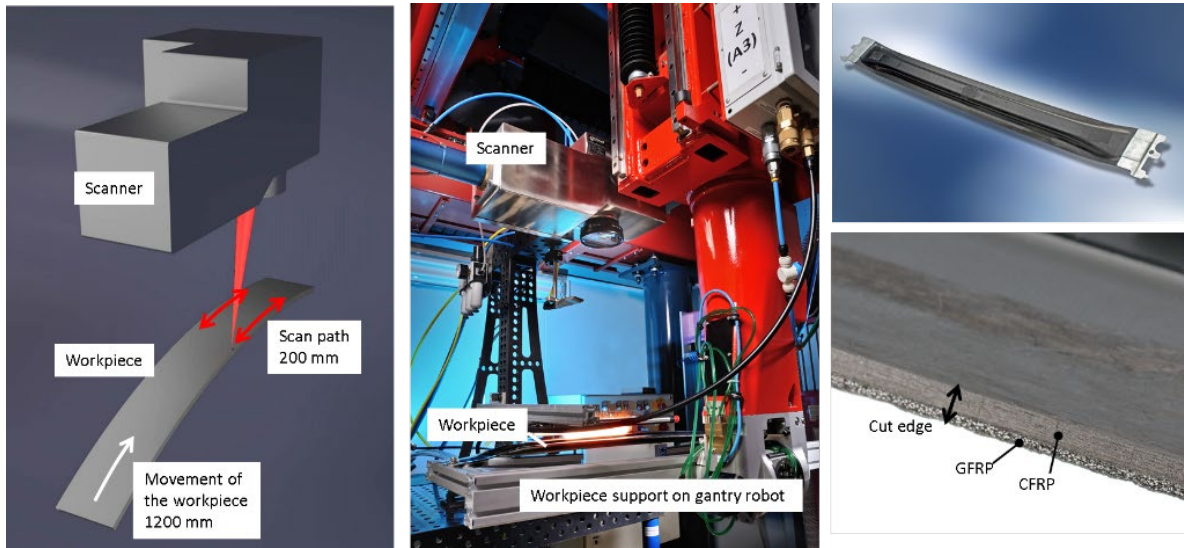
Arrangement of scanner and workpiece movement (left), processing of the demonstrator on a gantry robot (middle) and finished demonstrator with a detail showing the cut edge (right).
